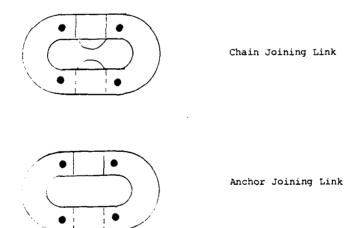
NACCO 4-Rivet Joining Links; Dimensions Not Known
